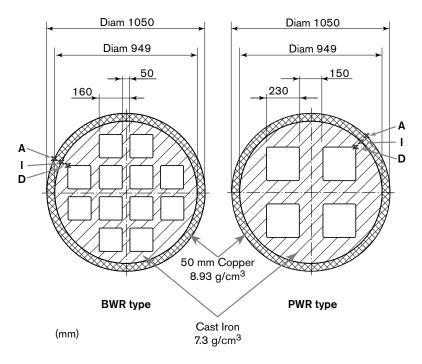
Schematic design of insert for 12 BWR or 4 PWR assemblies for a 50 mm thick copper shell.
